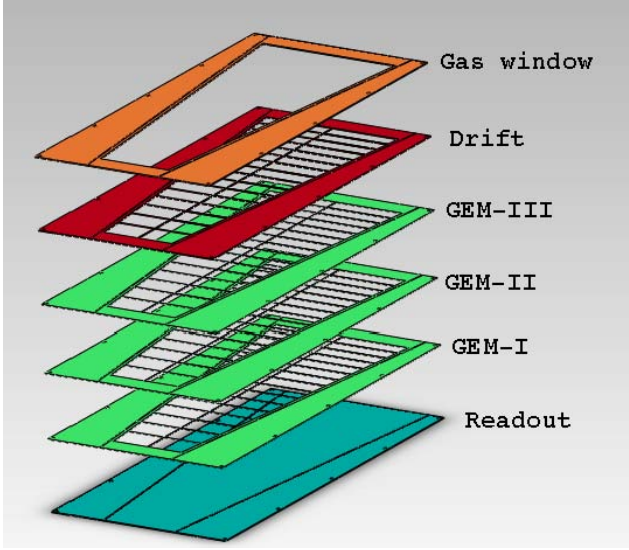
The frame assembly for a GEM module prototype of the size proposed for the largest SoLID GEMs
